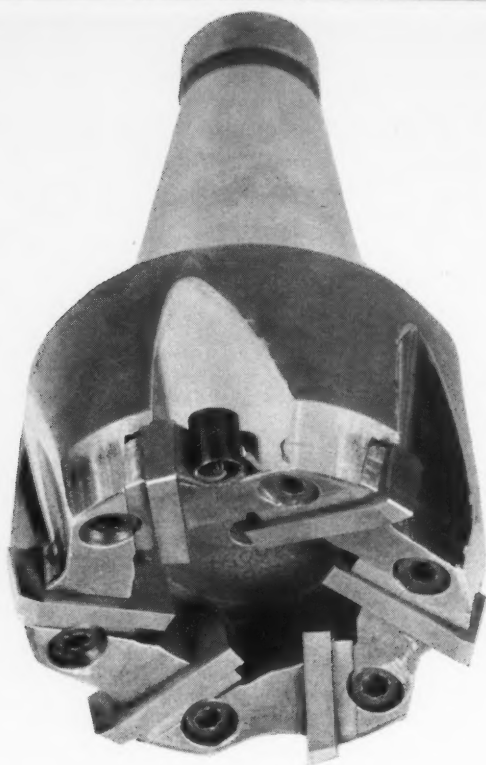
Modern 4-in. milling cutter for machining steel and non-ferrous metals.
